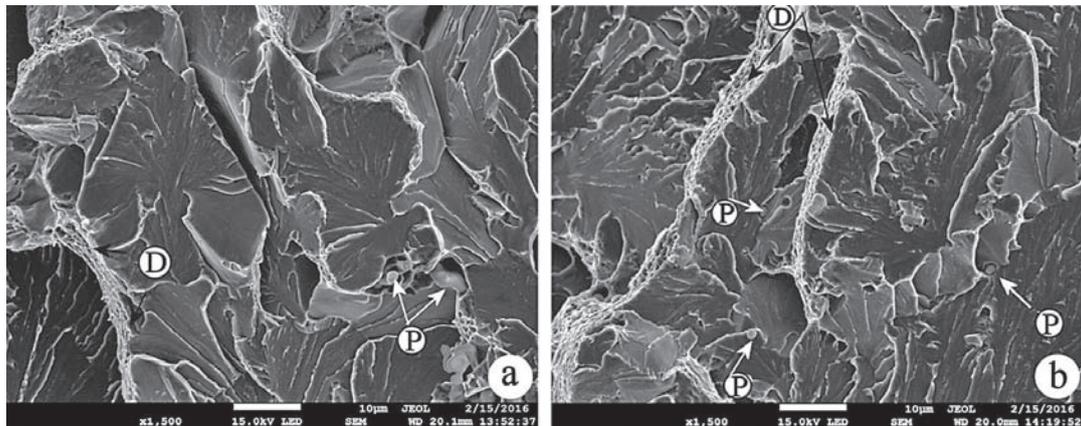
Brittle fracture surface: a – non-modified, b – modified (– 40 °C)
